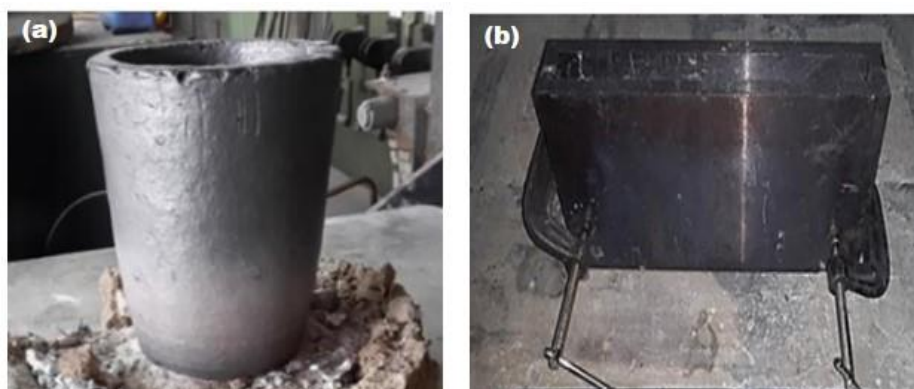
(a) Silicon carbide crucible (b) Mold used
